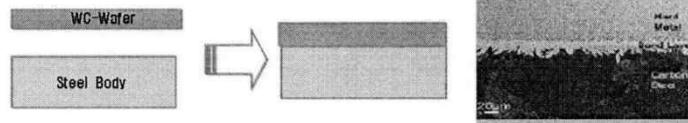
The Development of DME Fuel Pump Fuel Cam using Diffusion Bonding Technique
